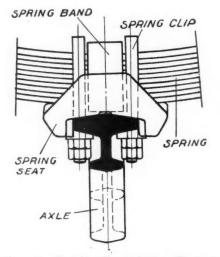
Peerless Front Spring Bumper and Integral Spring Seat
